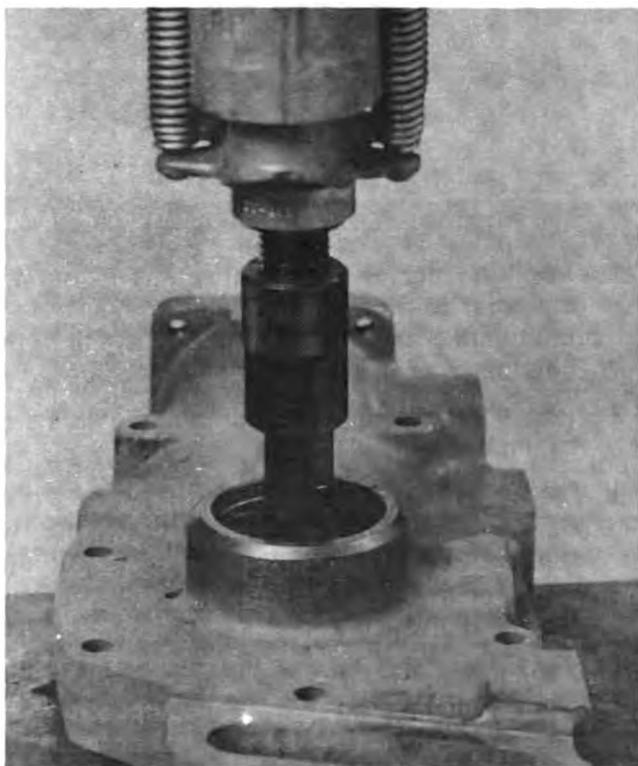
(N10887). Install The Seal Into The Housing.
